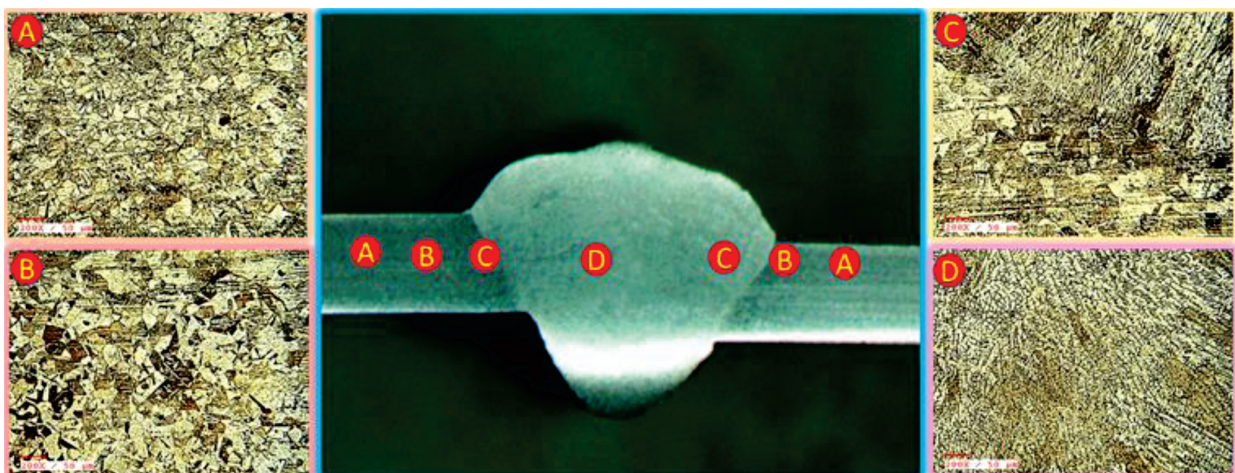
OM images: A) base metal, B) heat affected zone, C) weld interface, D) weld zone
